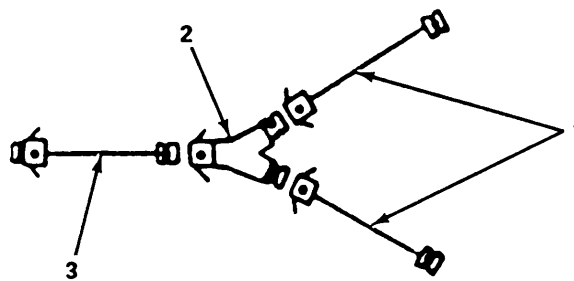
Wye Fitting Assembly, Removal/installation.
